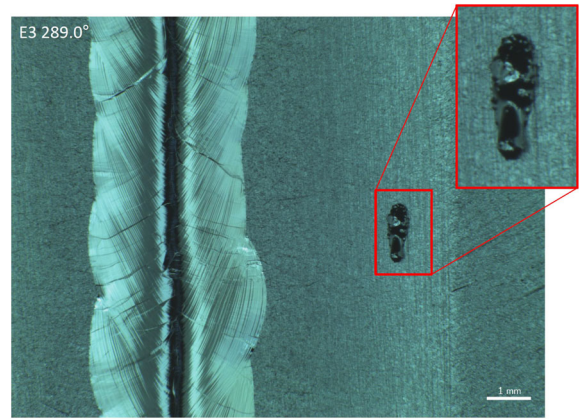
OBACHT image of a typical weld spatter found close to the equator welding seam. A maximum E_{acc} of 35 MV/m has been reached after the repair of the cavity.
